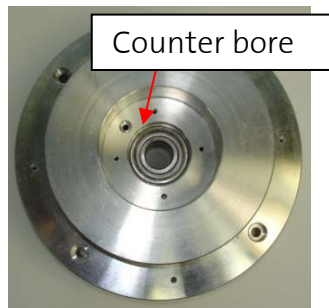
M3 Counter Bore Hole for Axial Accelerometer Fixation.
